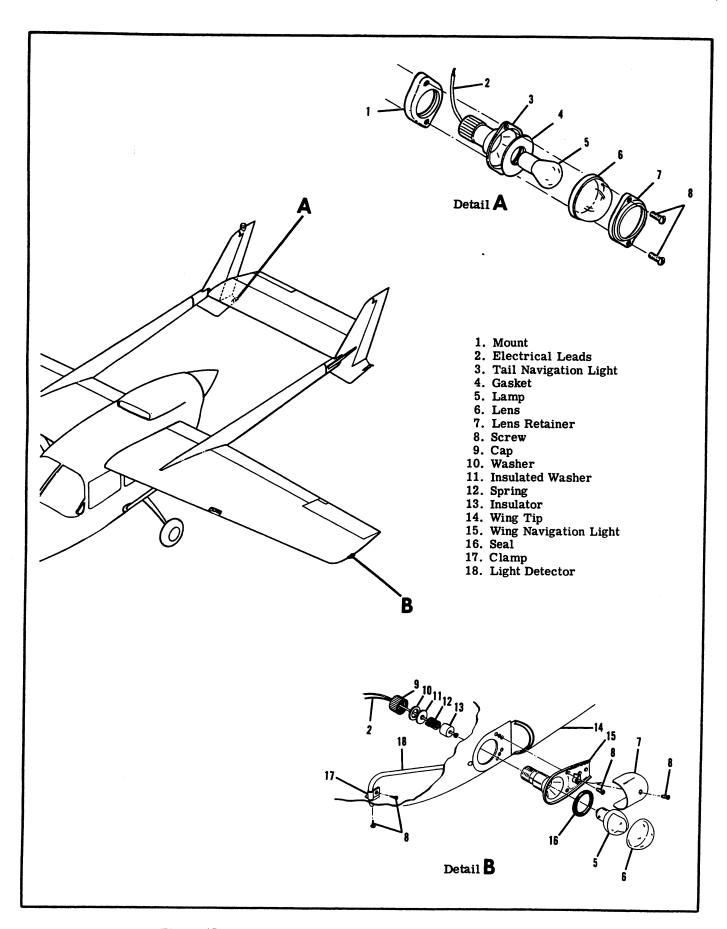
A-9. Navigation and Strobe Light Installation (Sheet 1 of 3)
